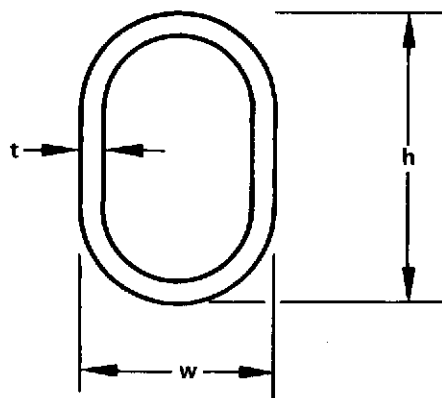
Advanced Space Engine Thrust Chamber Tubular Nozzle Section Geometry
